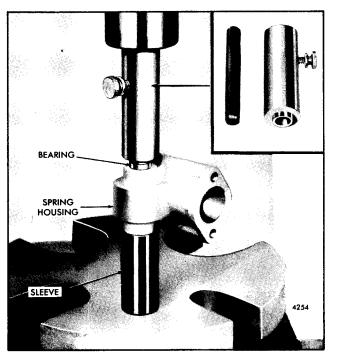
Installing Speed Control Shaft Bearings In Spring Housing using Tool J 9196
